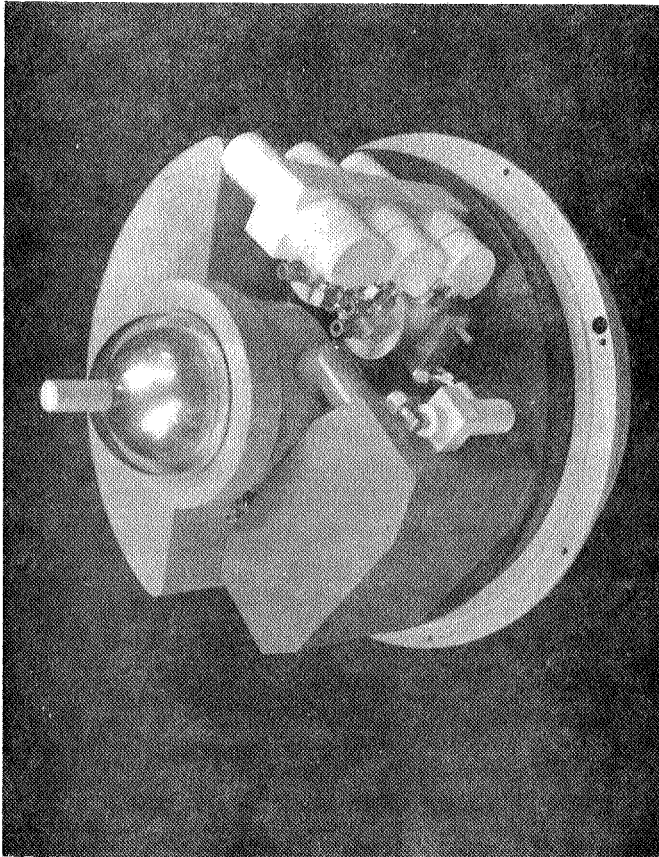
MECHANICAL ASSEMBLY FULL SCALE MOCKUP
